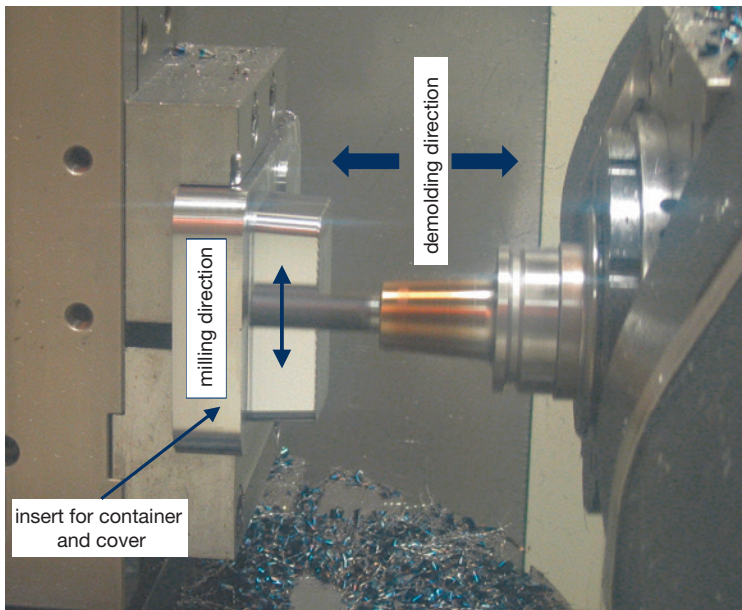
Milling insert [Factory picture: Gebr. Heller Maschinenfabrik GmbH, Nürtingen]
